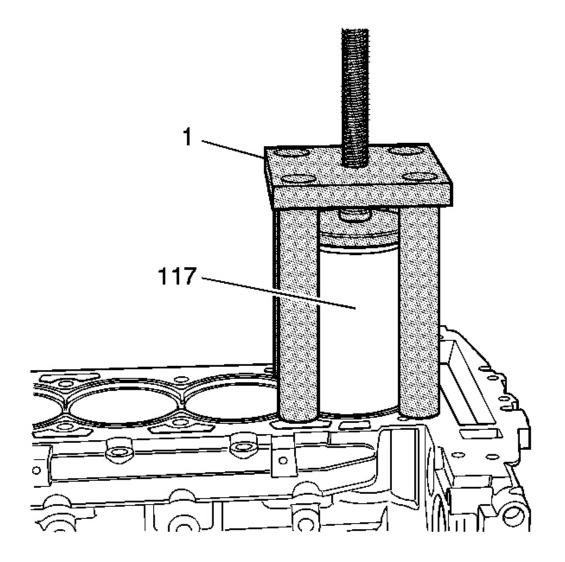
View Of Cylinder Bore Sleeve Fixture
